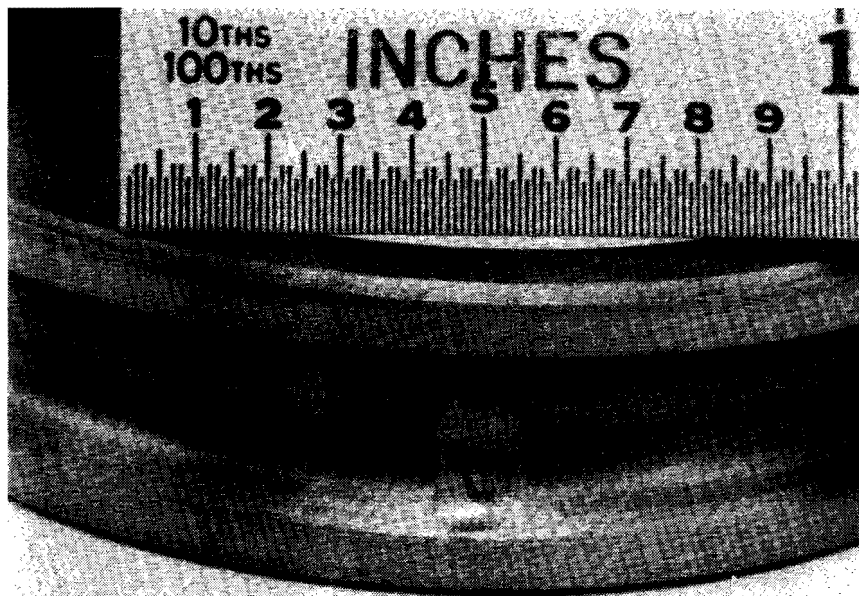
90-Degree Gearbox -424 Bearing Inner Race C/D,
